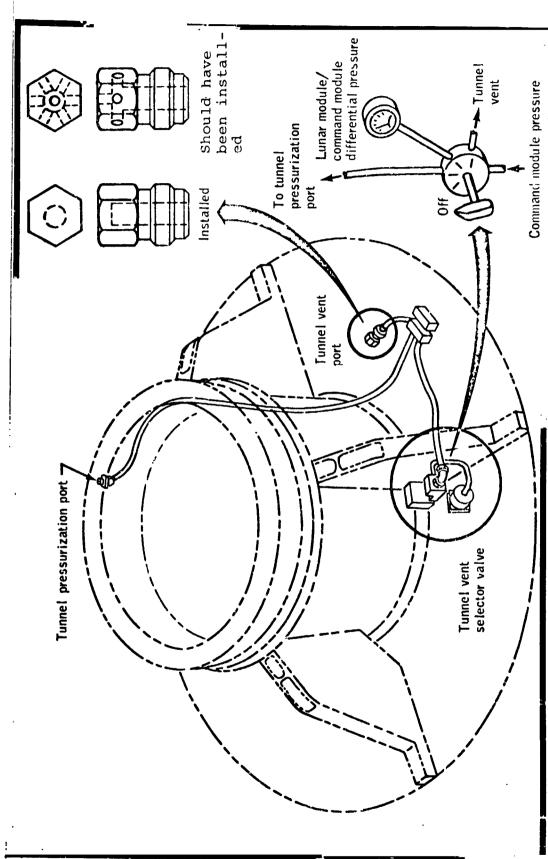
TUNNEL VENT SYSTEM.
